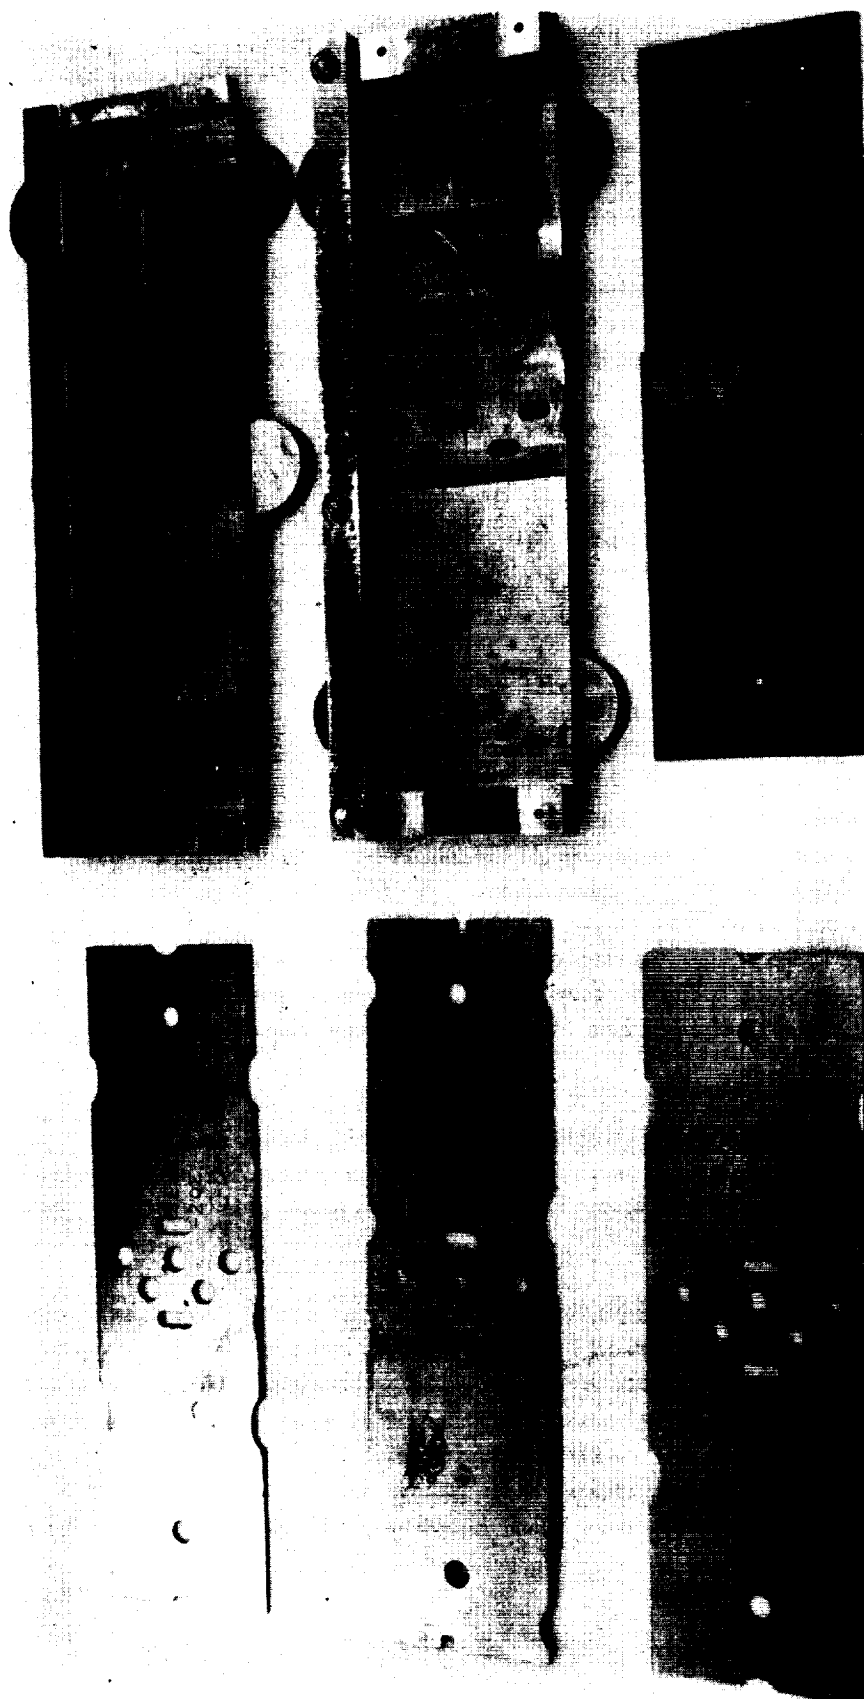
DRILL FIXTURE CONSISTING OF INTERCHANGEABLE BASES AND PLATES. DRILL SEGMENTS OF ONE SPECIMEN.
